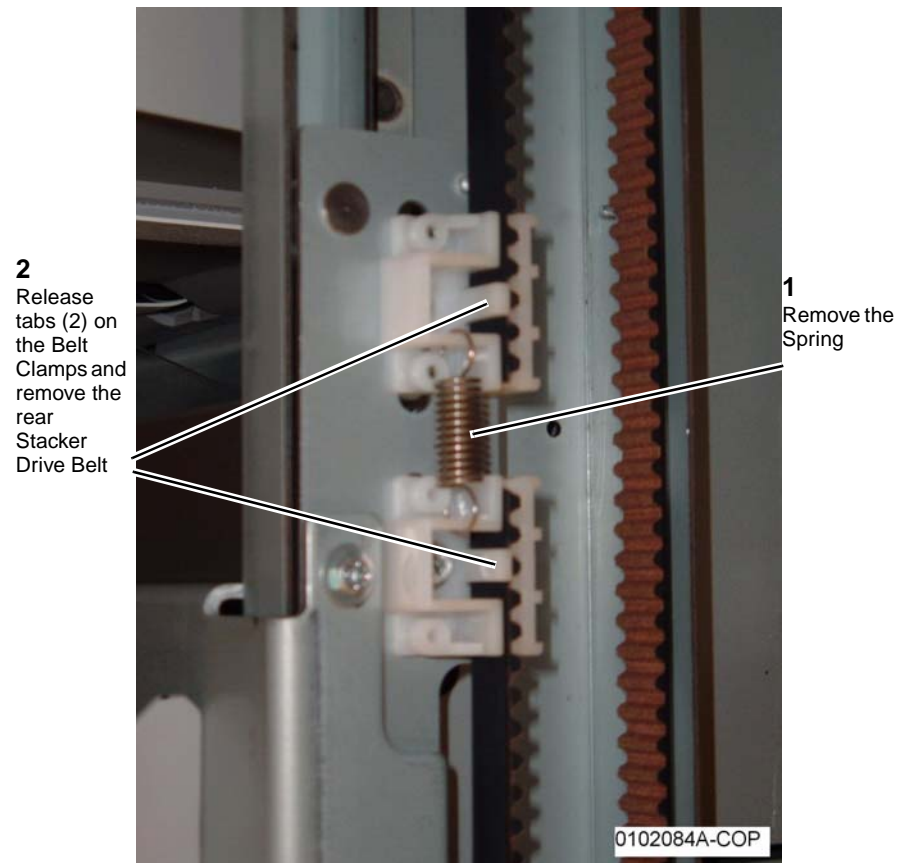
Removing the rear Stacker Belt (P Finisher shown)
